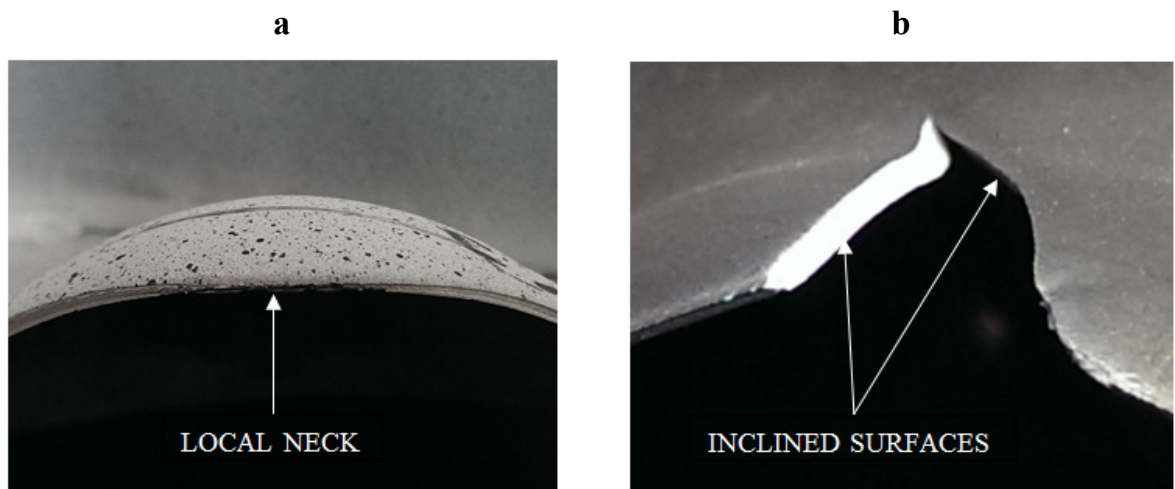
Pictures of test specimen: (a) Side view of fracture zone (QSB1). (b) Close up view of crack faces (QSB2).
